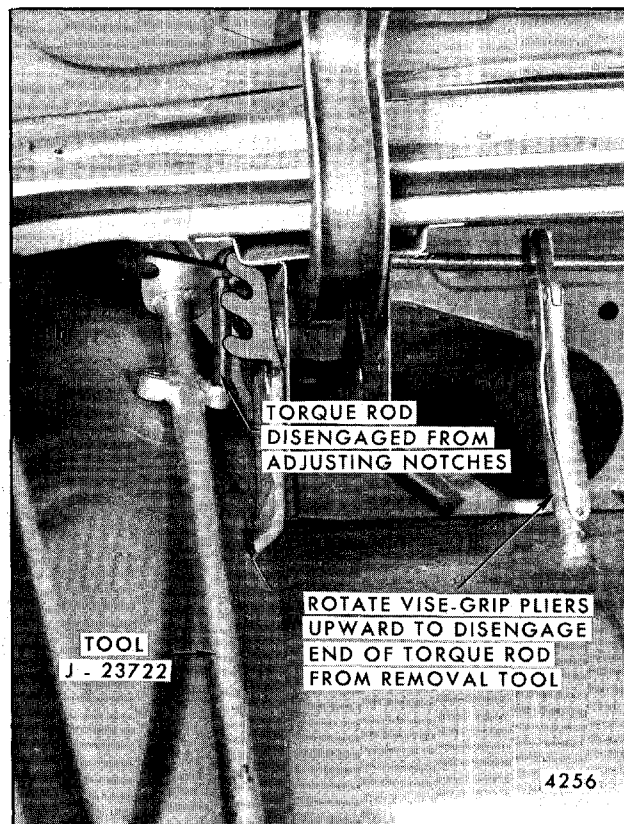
Rear Compartment Torque Rod Removal - Cadillac "E" Styles
